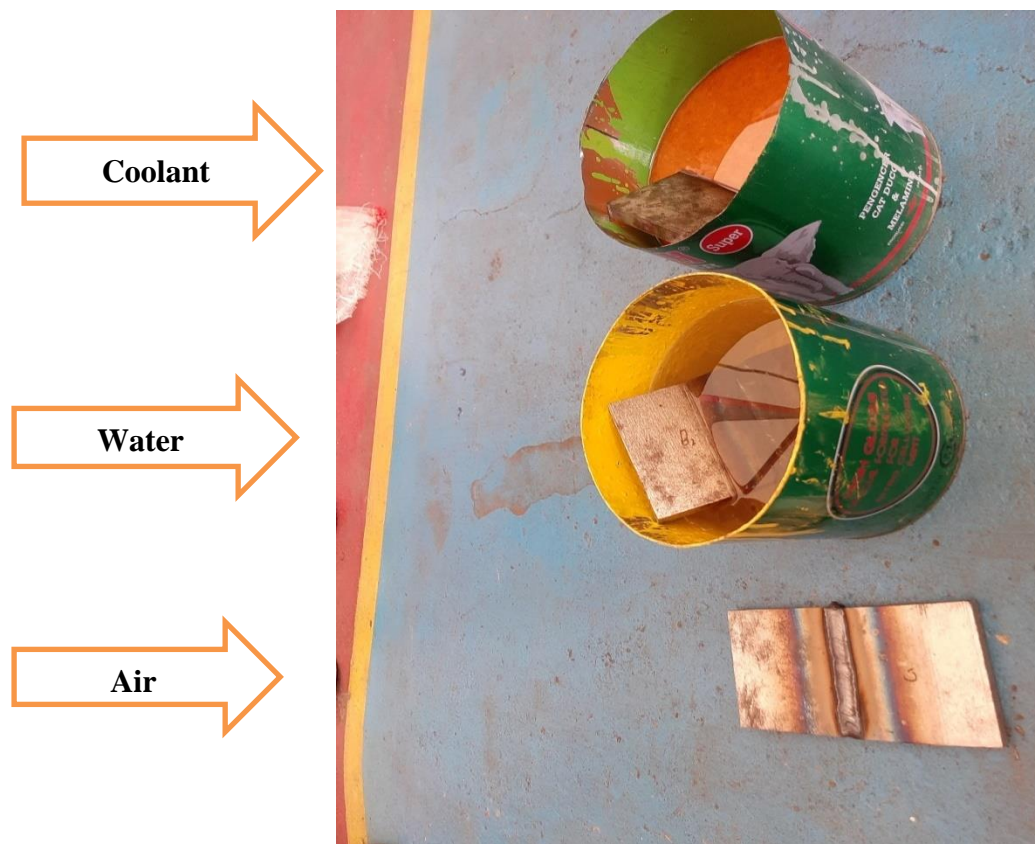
Steel Plate After Welding and Cooled by Cooling Medium
